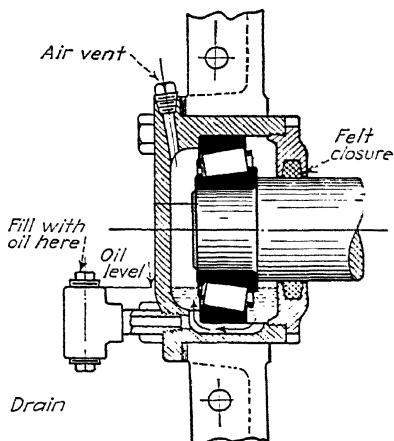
Bath oiling applied to a tapered roller bearing.
